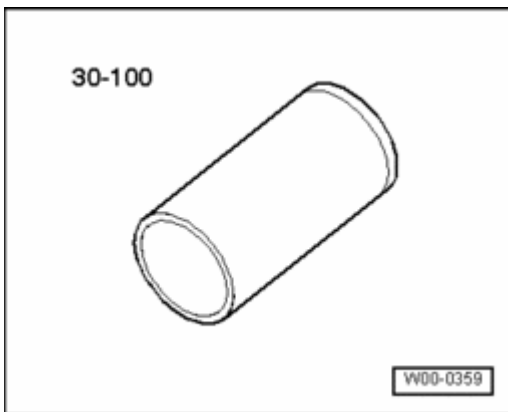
Press Tube 30-100 Identifying Special Tools - Oil Pump/Front Sealing Flange, Drive Chain And Chain Sprocket For Oil Pump, Removing And Installing
